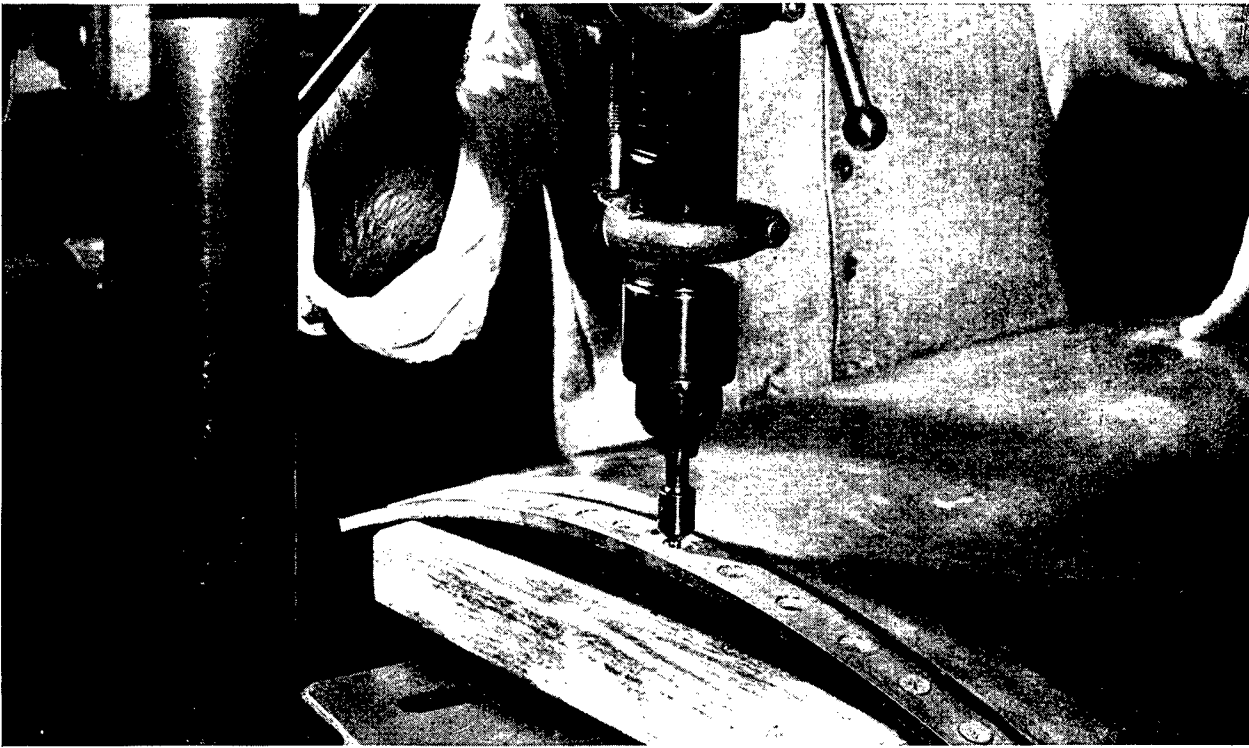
Two methods of treating bolt holes in a sandwich part—drill countersinking.
